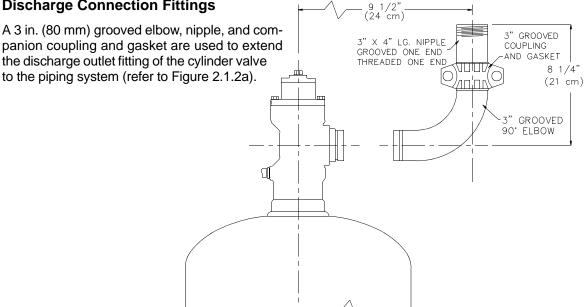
Discharge Connection Fitting Stock Number 20710368
